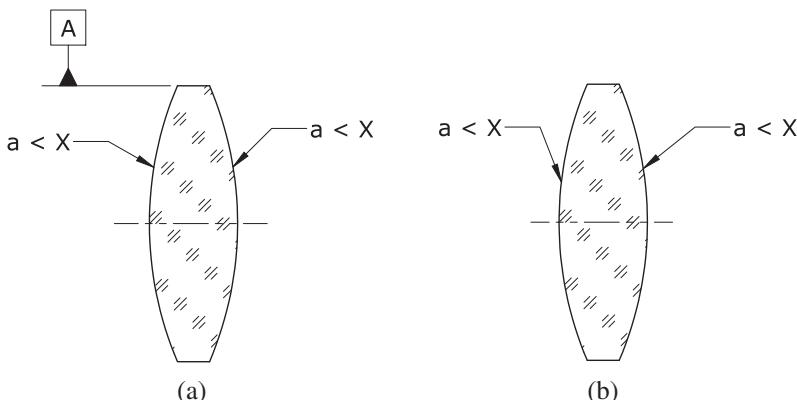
Axial runout tolerance on both optical surfaces relative to the cylindrical surface shown (a) explicitly and (b) implicitly.
